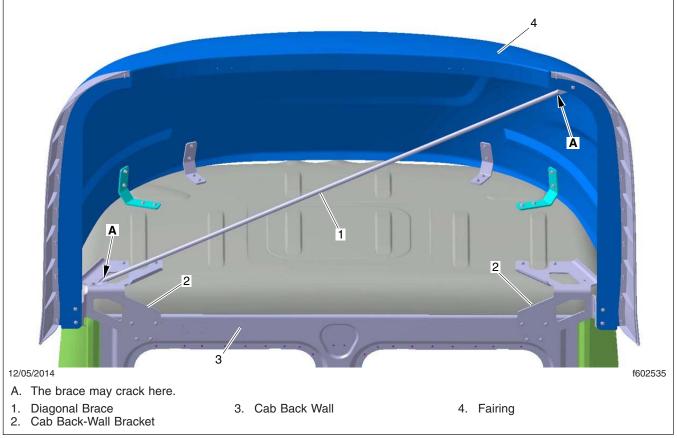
, FE13 Roof Fairing with Single Diagonal Brace
